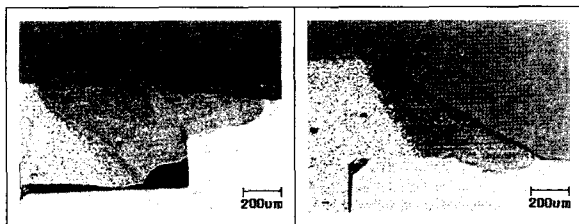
Cross section of various weld joint by pulsed Nd:YAG laser
